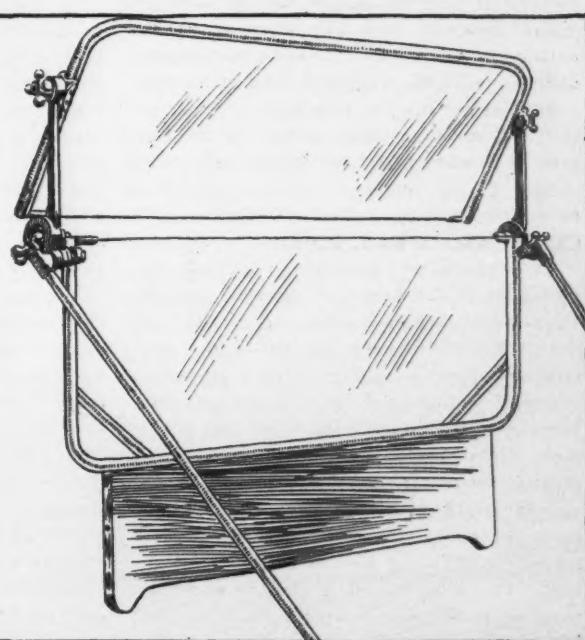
SPRAGUE CLEAR-VISION WINDSHIELD
